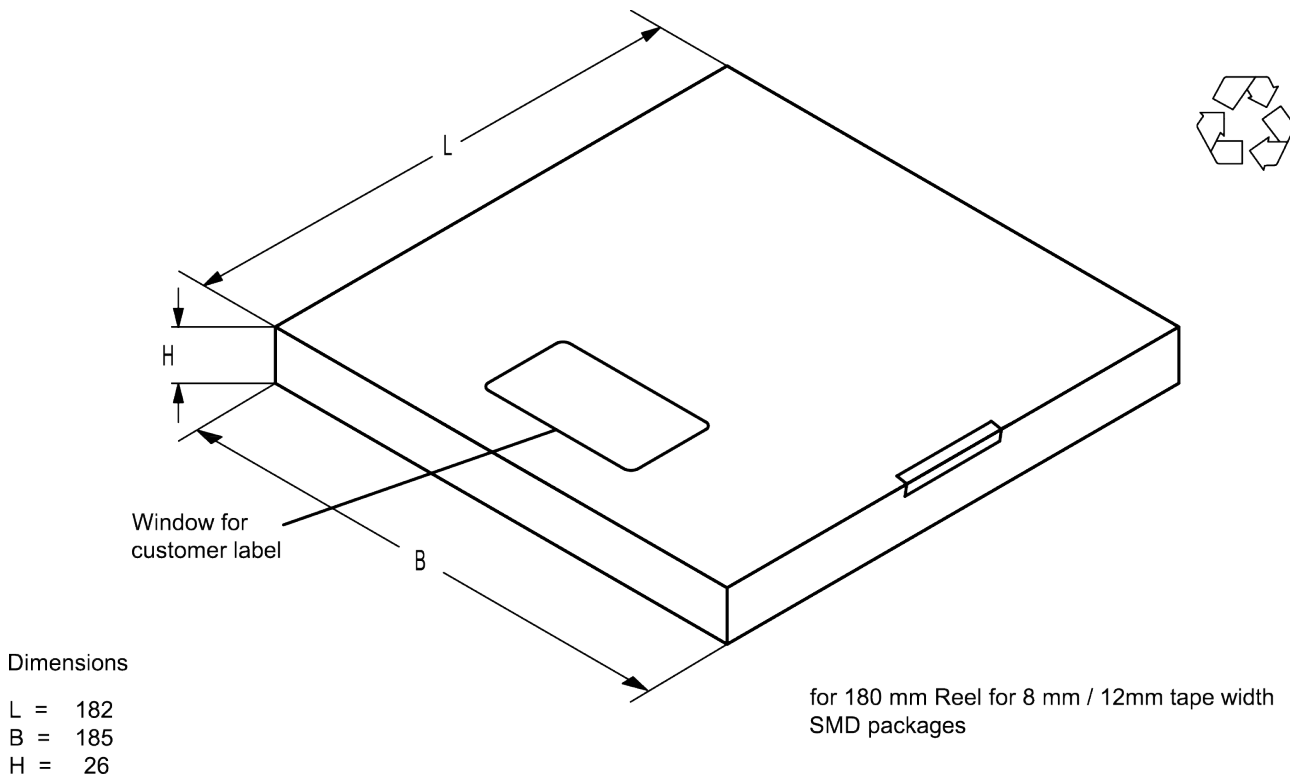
Drawing of folding box for reel with diameter of 180 mm.
